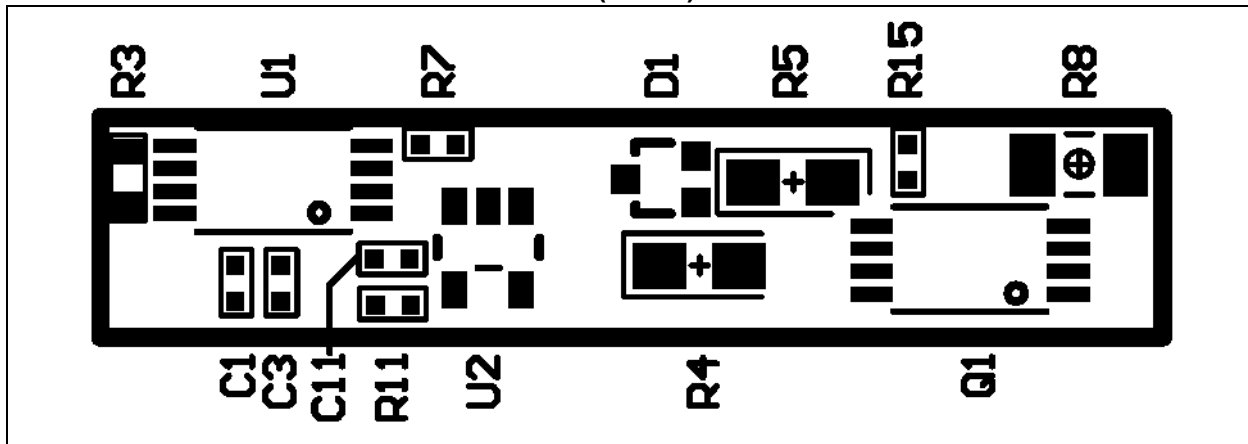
PS7051 BOARD ASSEMBLY (SIDE 2)
